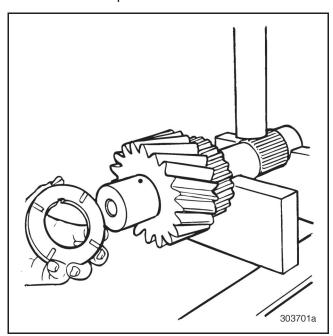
Removing Thrust Washer and Lockpin from Countershaft
